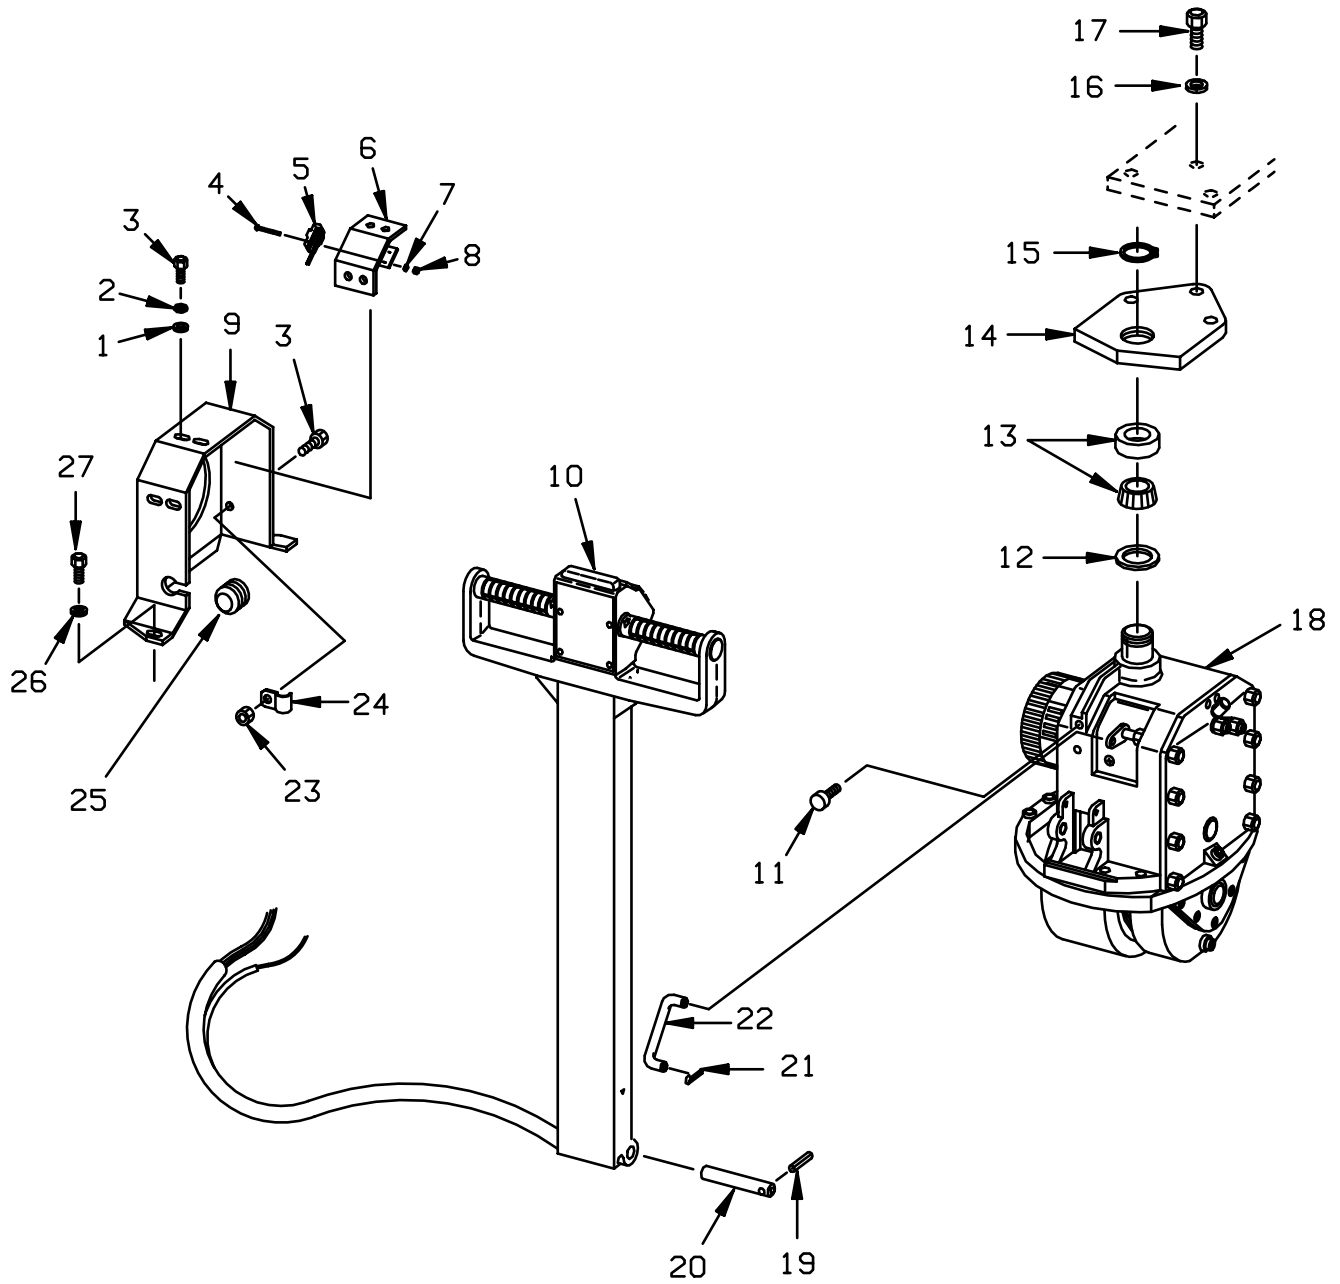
DRIVE MOTOR ASSEMBLY (20844-01, G.E.)
